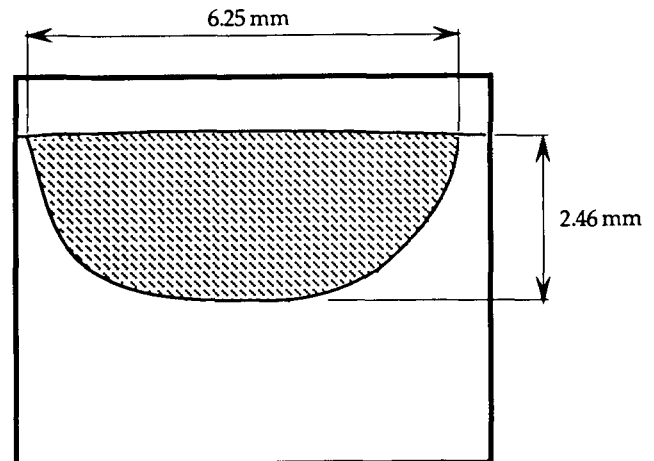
Experimental weld pool shape due to Zacharia *et al.* (100 A).^[20]
